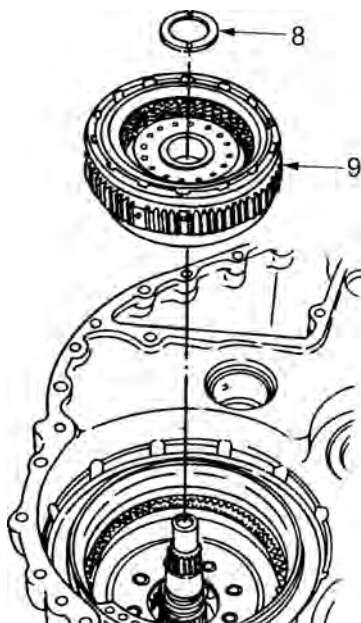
Fourth and Reverse Clutch Assembly Installation.
